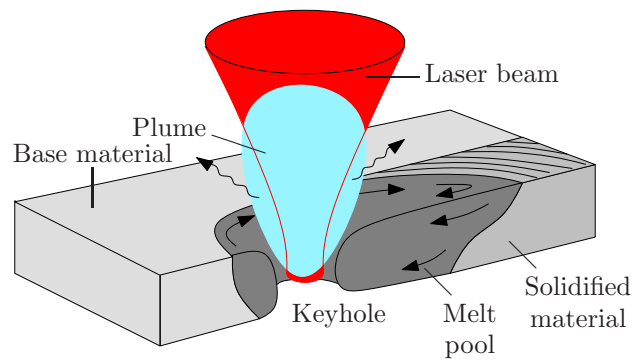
Schematic cross section of the full penetration keyhole laser welding process of a thin sheet.
